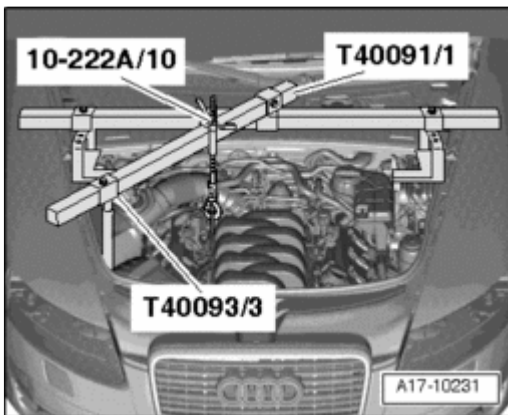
Assembling Other Components Of Engine Support Bridge 10 - 222 A
